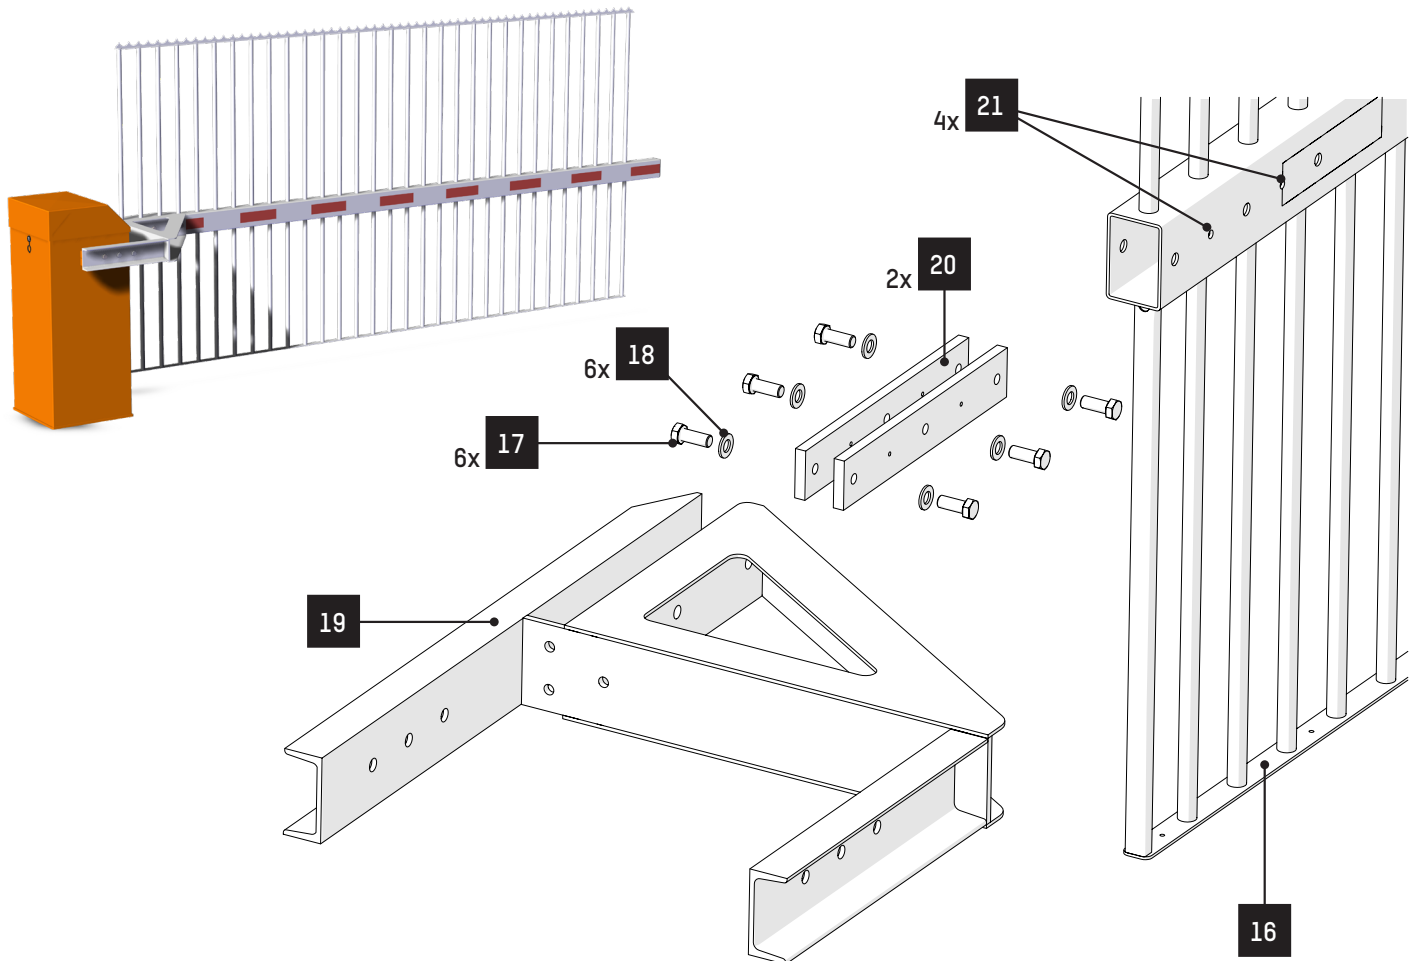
Installation of aluminium rectangular arm with rigid fence for BL 47 - Exploded view
